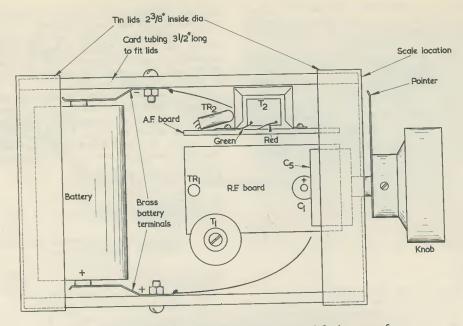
Mechanical layout. The side of the a.f. board further away from the reader is adjacent to the upper side of the r.f. board
